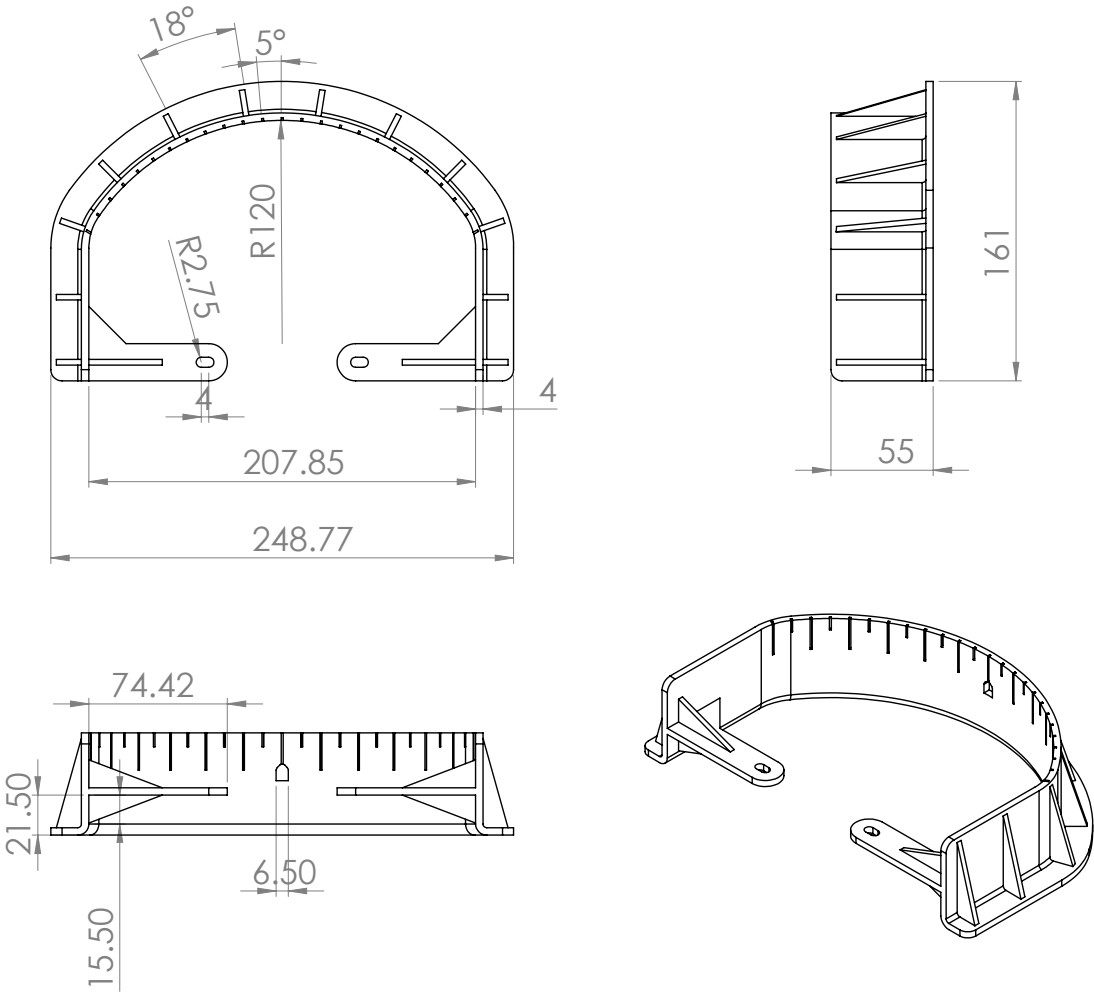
Dimensions of the 3D printed barrier used to test output force and speed of the preliminary prototype (mm).
